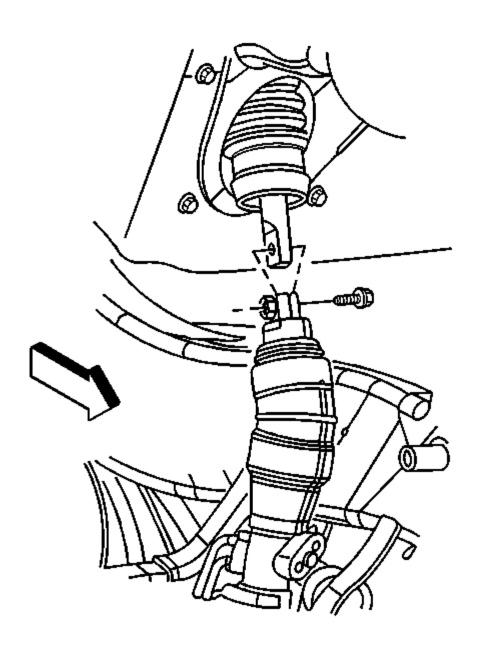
Steering Column To Steering Gear Connection Courtesy of GENERAL MOTORS CORP.
